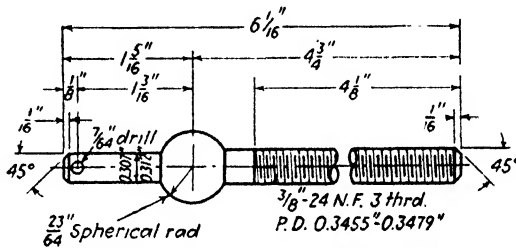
The ball on this bolt is produced by heading, and the short end is extruded.
